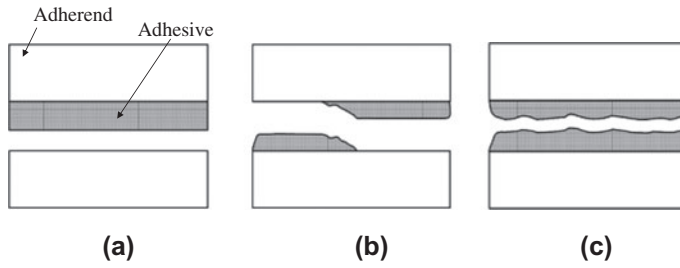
Failure modes of the adhesively bonded joints. (a) Interfacial failure, (b) Transient failure and (c) Cohesive failure.
